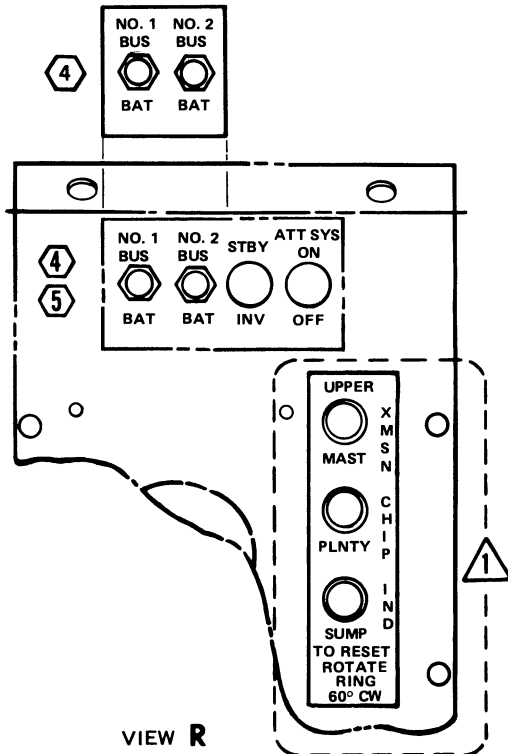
A. Fuselage Equipment Location (Sheet 6 of 7)
